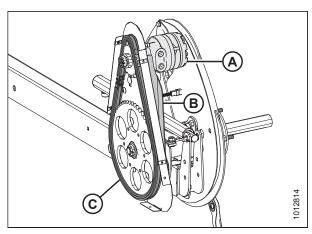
Single-Reel Drive Shown – Double Reel Similar
